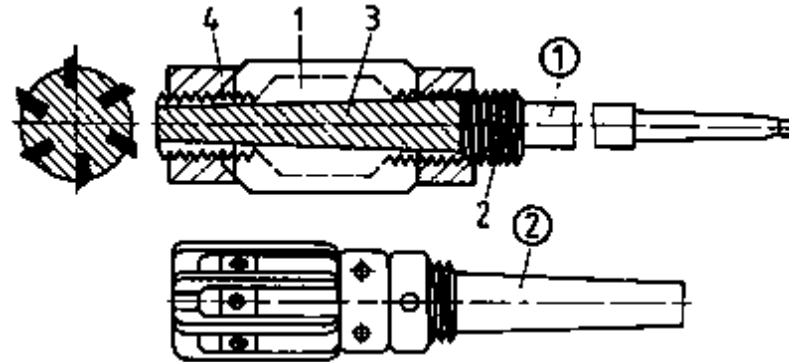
Adjustable machine reamer (1) for through holes; (2) for blind holes
